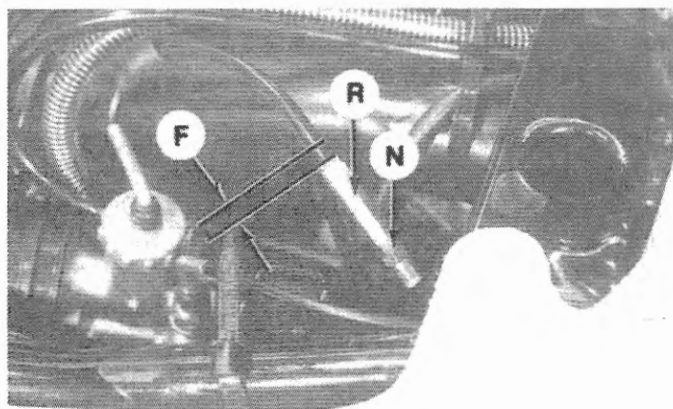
Slide dust boots away from adjuster assembly and loosen locknut (N) and rotate adjuster (R) as required to obtain correct free play (F).
